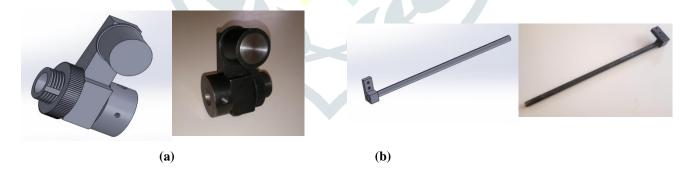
CAD file of assembly of the chain collet and original component made as designed
